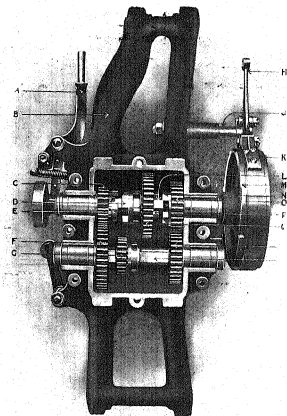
Argyl Three-speed Gear Box, showing cover removed
